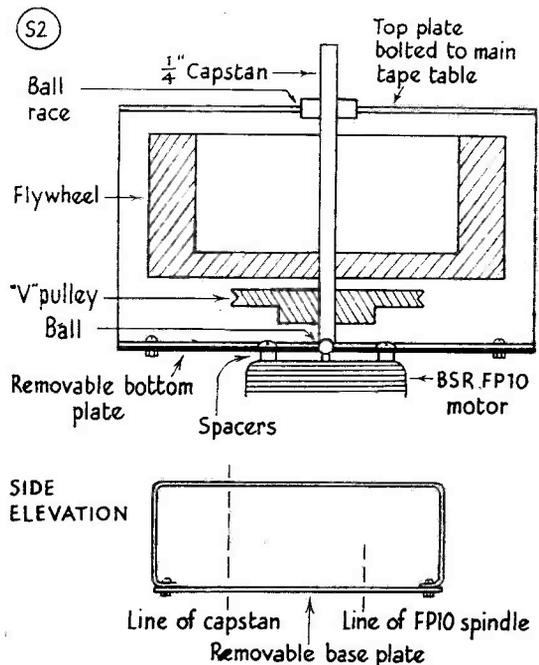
Sectional detail of capstan unit. Mechanism for withdrawing pressure roller for tape loading, for fast forward and rewind also incorporated in this unit but not shown. Capstan speed 600 r.p.m.
